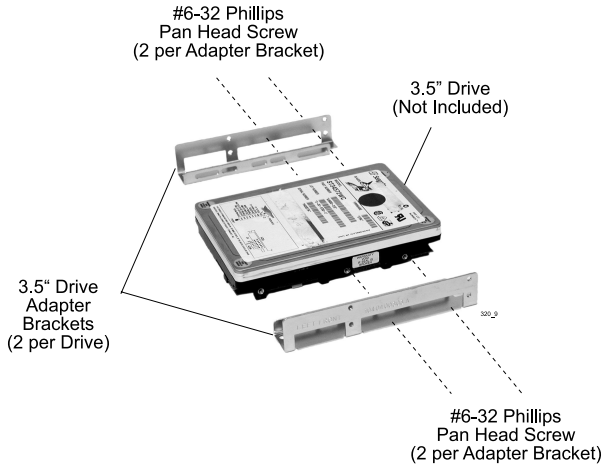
Attaching the 3.5" Adapter Brackets to the Drive
